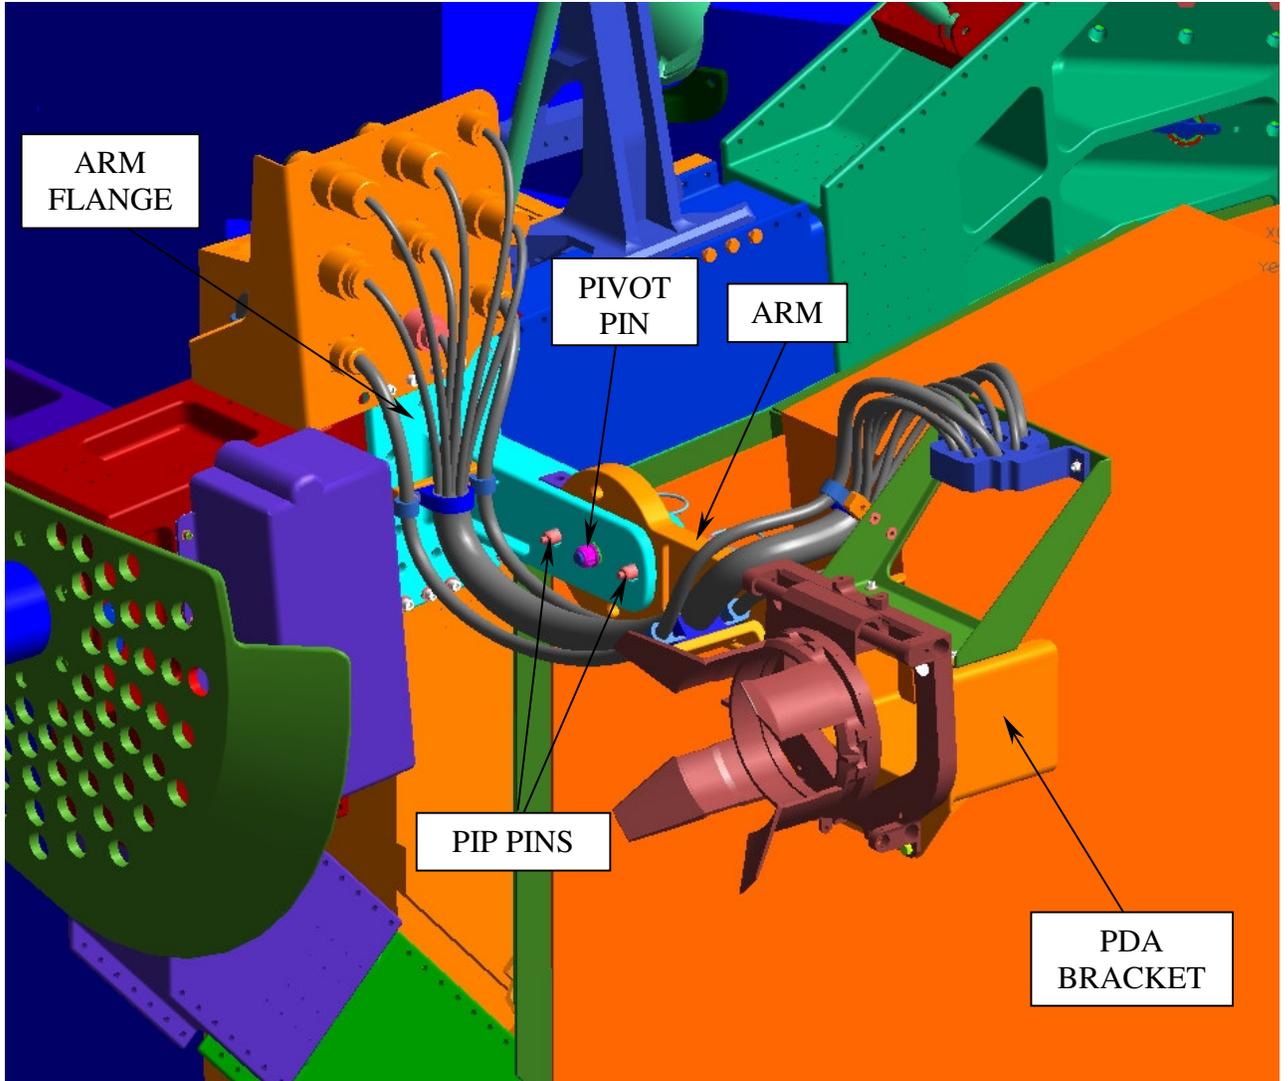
ROEU Assembly Nominal Configuration (Iso View from Starboard Side)
